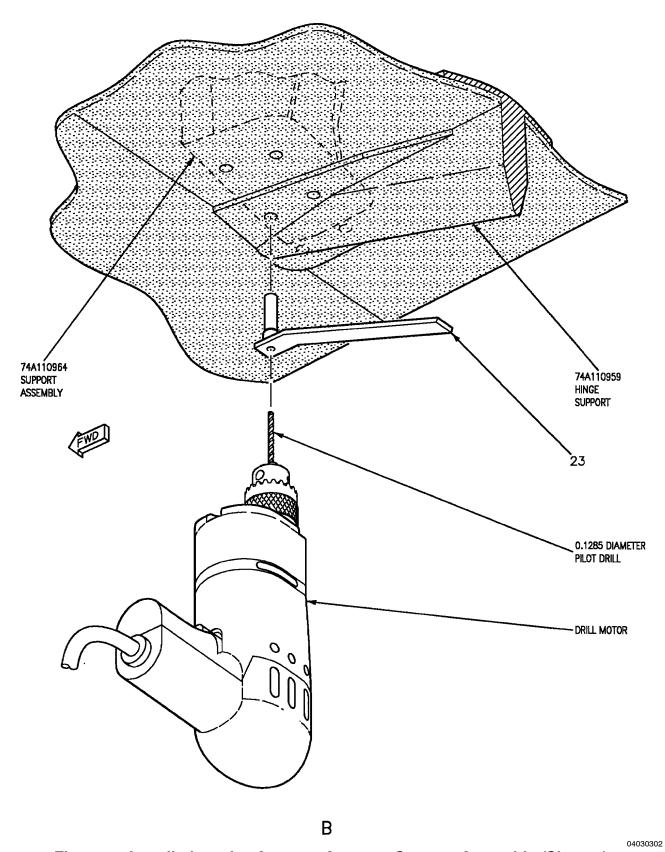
Installation of 74A110964 Actuator Support Assembly (Sheet 2)
